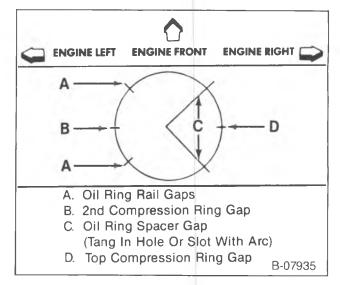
Piston Ring End Gap Location (7.4L Engines)
